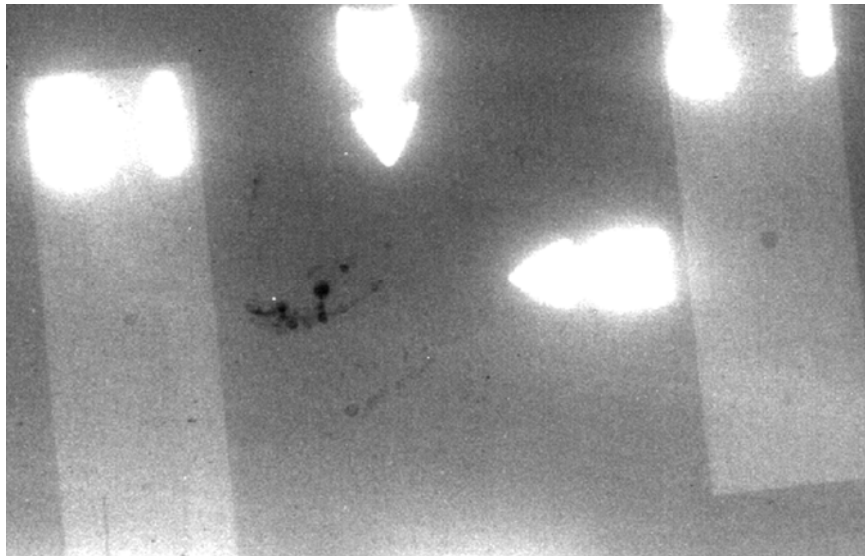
Image of Fabrication Flaw Using Film Radiography
